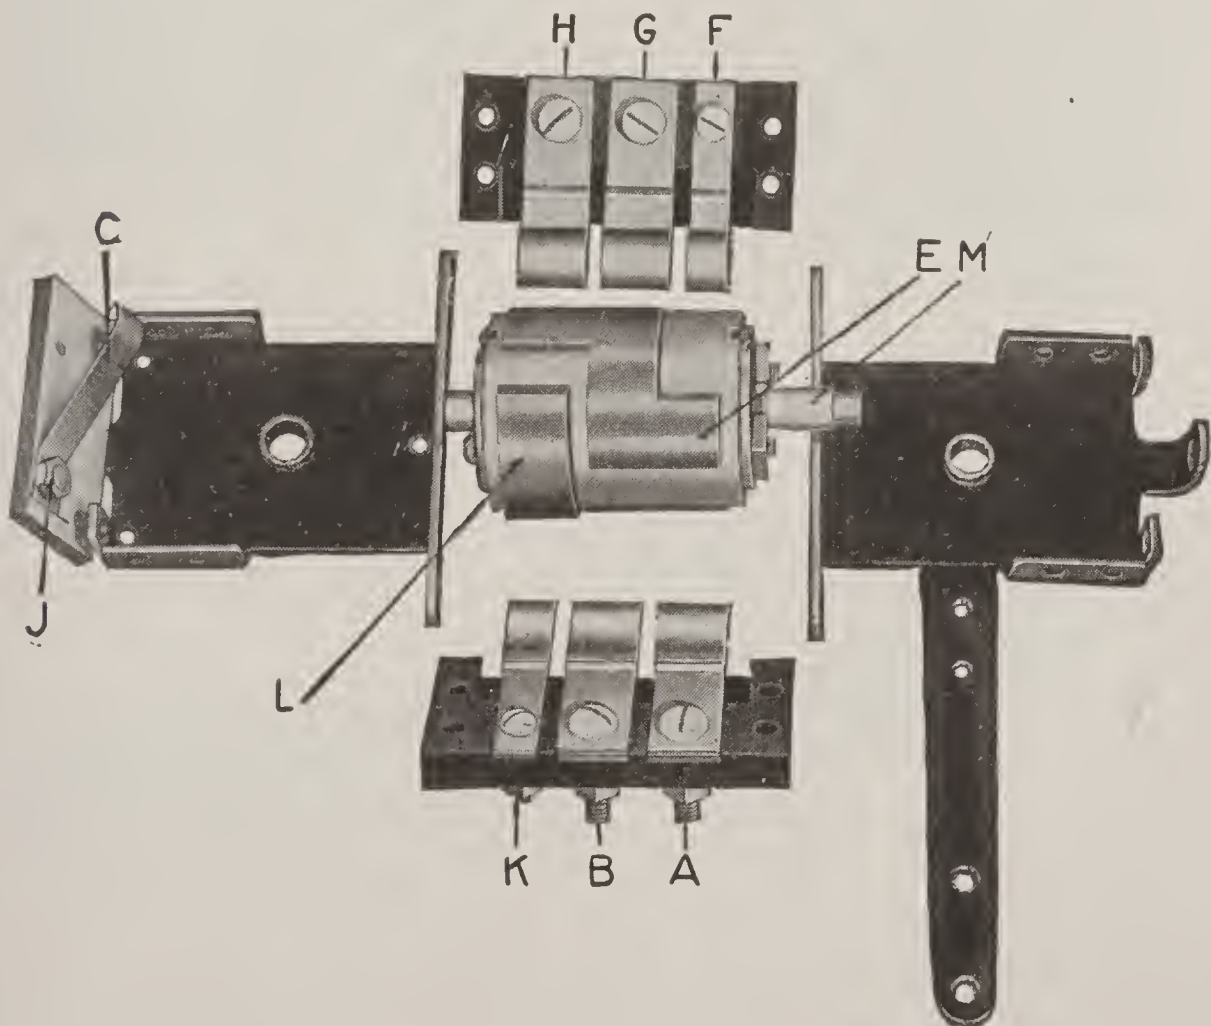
Exploded View of Drum Switch. A, B, F, G, H, and K—Contact Screws to Contact; C—Auxiliary Contact Finger; E—Drum Contact; J—Screw Holding C; L—Auxiliary Drum Contact; M—Shaft
